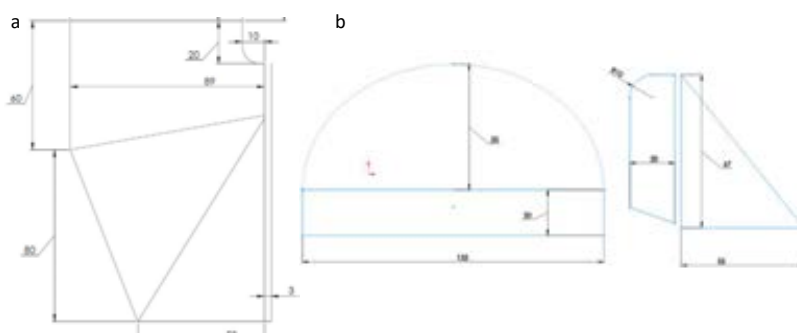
Proposed design and dimensions: a) 140 wing; b) tail
